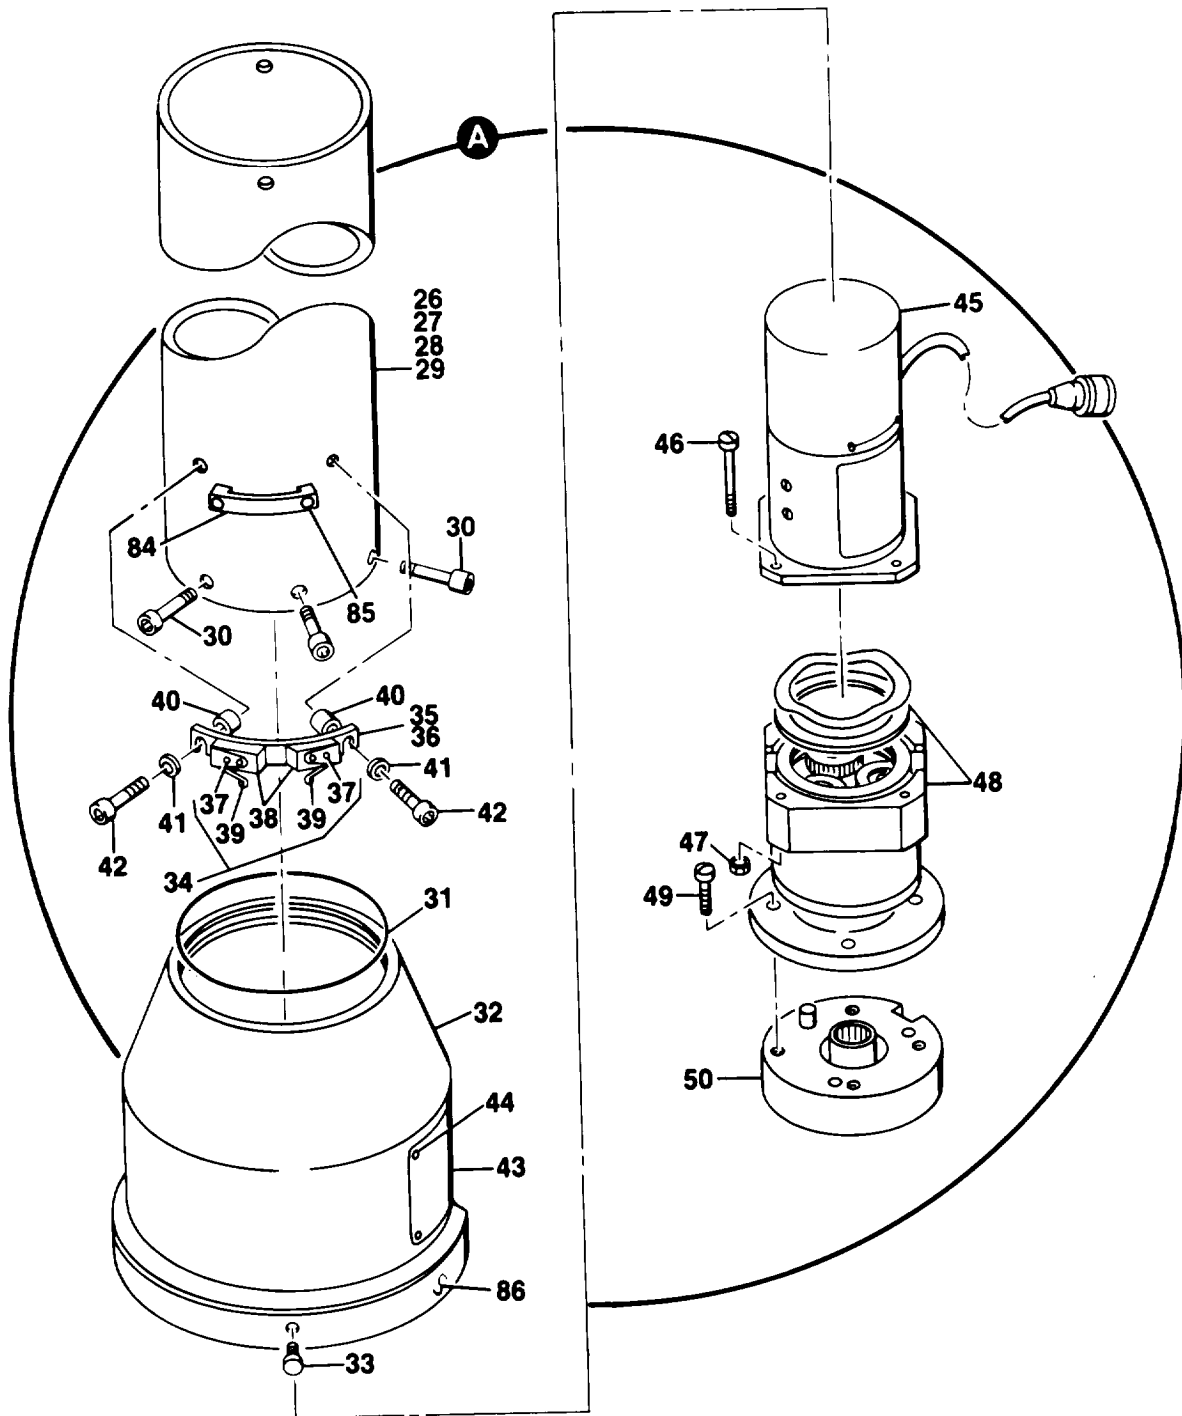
BOOM POSITION SUPPORT ASSY (SHEET 2 OF 3)
